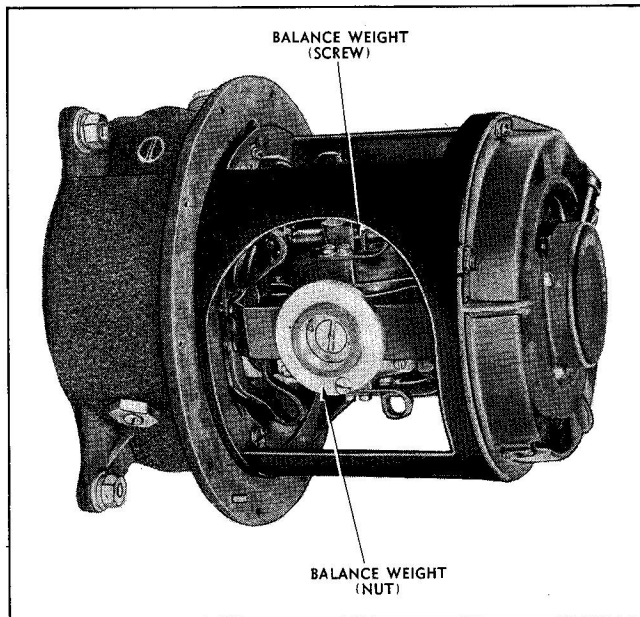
Static Balancing of Gyro Assembly and of Gyro and Vertical Ring Assembly
